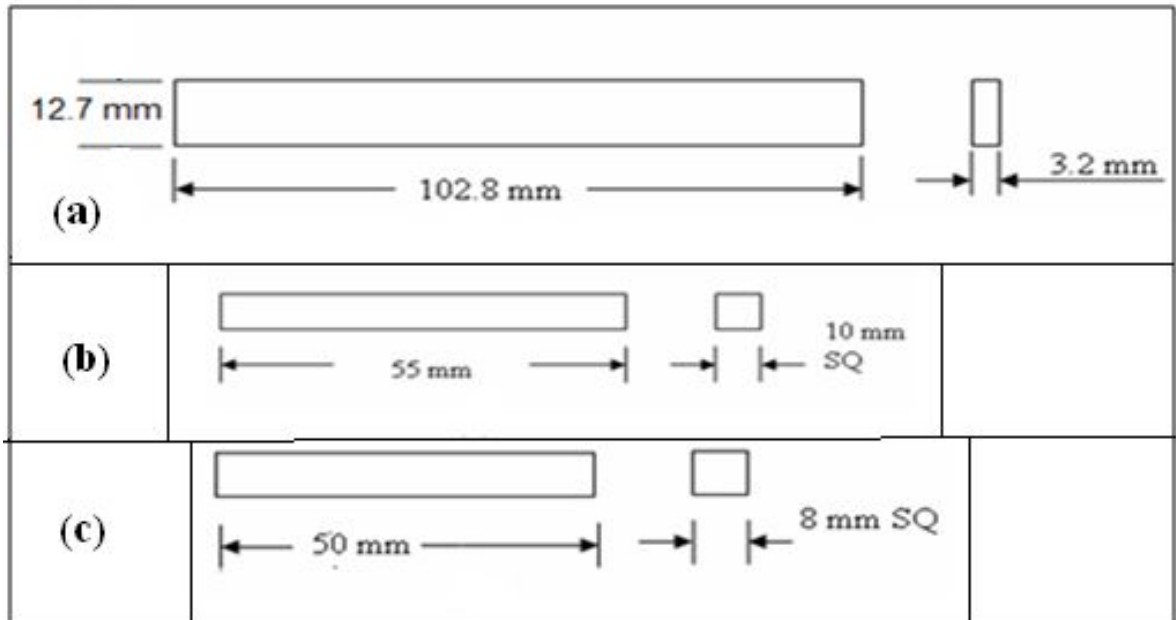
(a) Flexural test specimen, (b) Impact test specimen and (c) Wear test specimen
